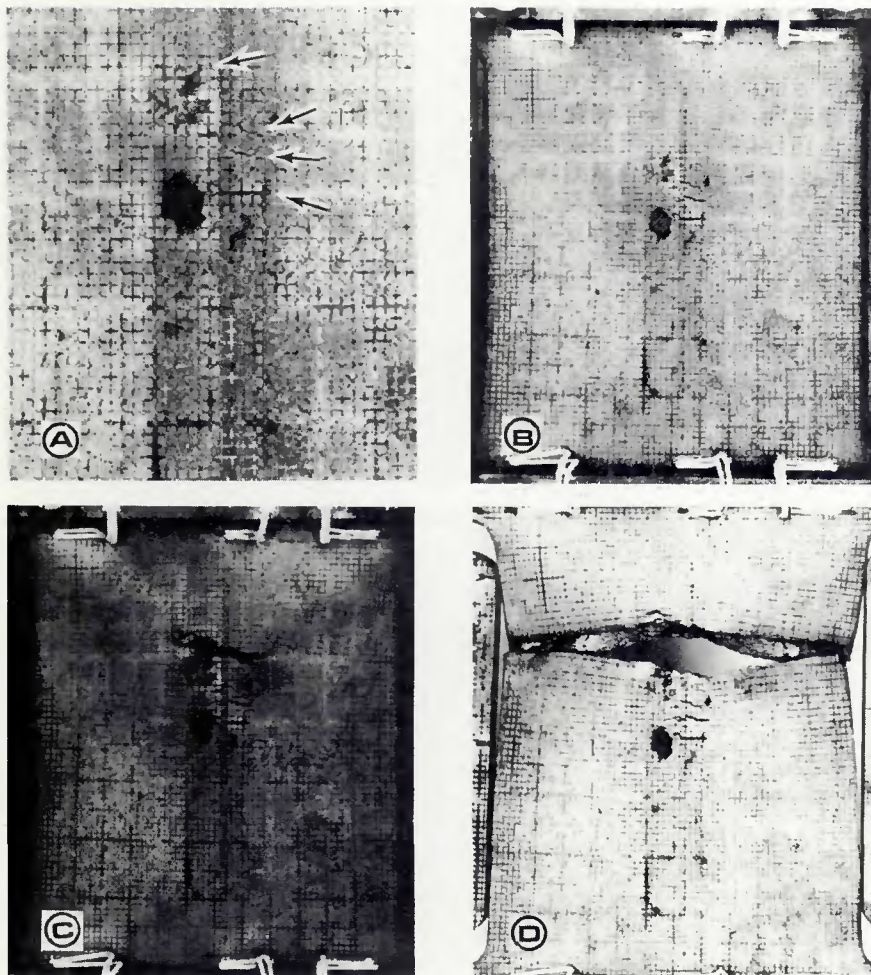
Weld face of low-ferrite V-groove weld, 240: A—500 h, X2; B—1000 h, X1; C—1219 h, X1; D—rupture, X1 (reduced 50% on reproduction)
